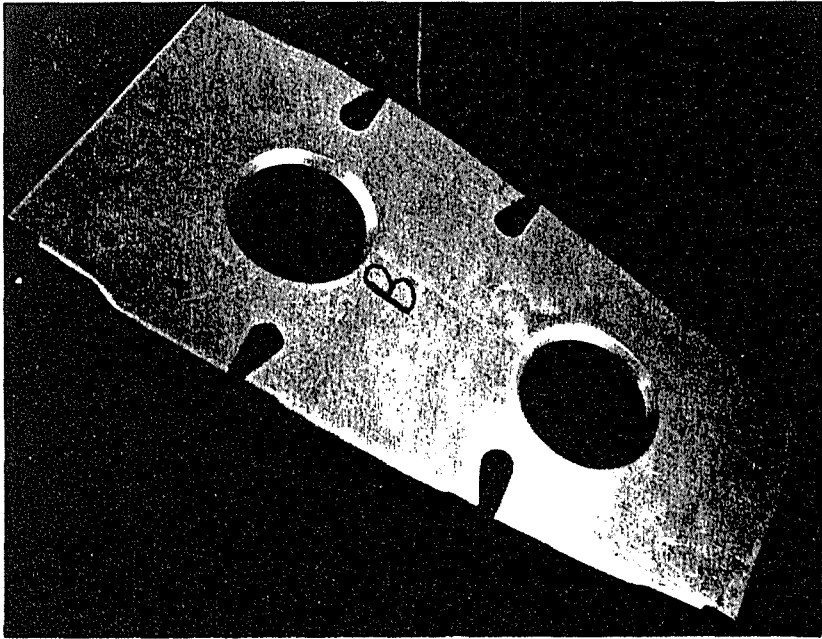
Typical structural detail part. (Rib 0.64 mm thickness). Formed in 8090C-T3.
